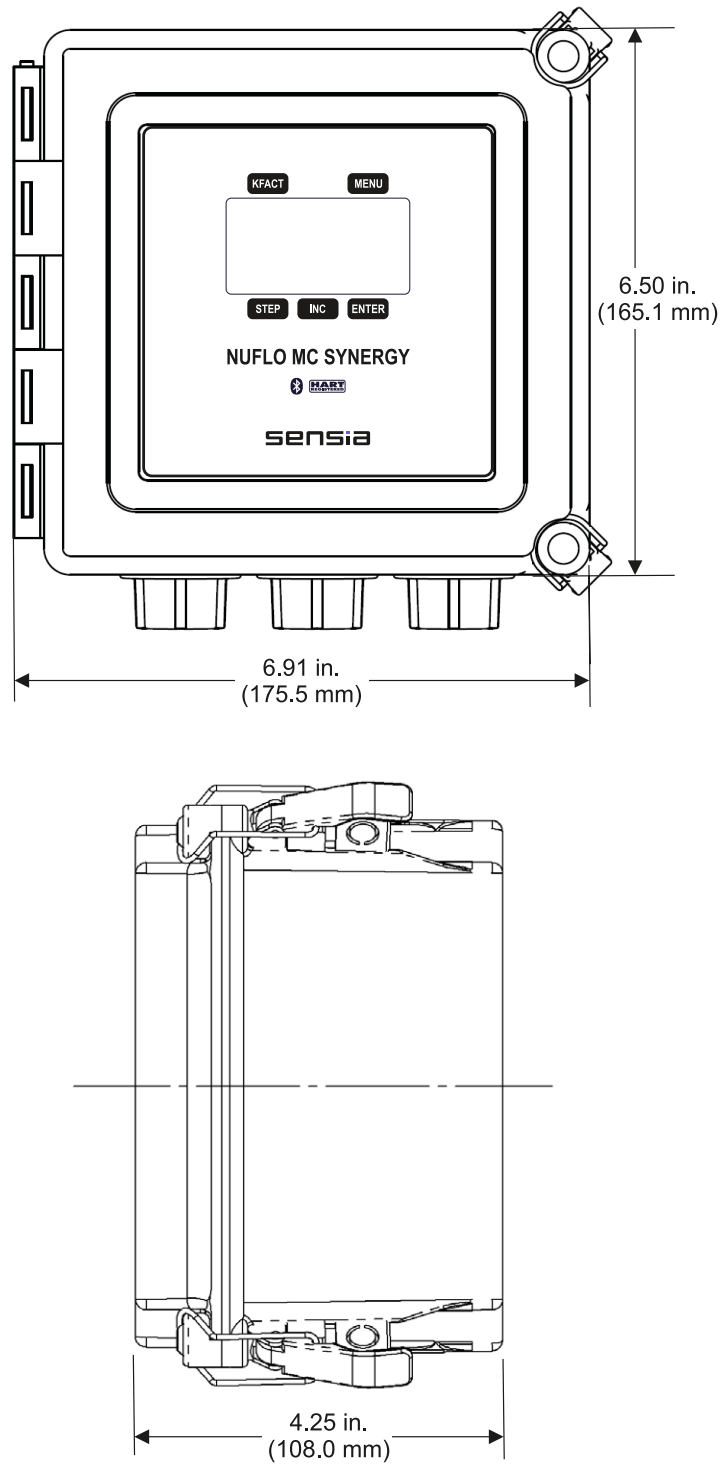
Typical mount dimensions in inches (millimeters) for direct-mount installation
